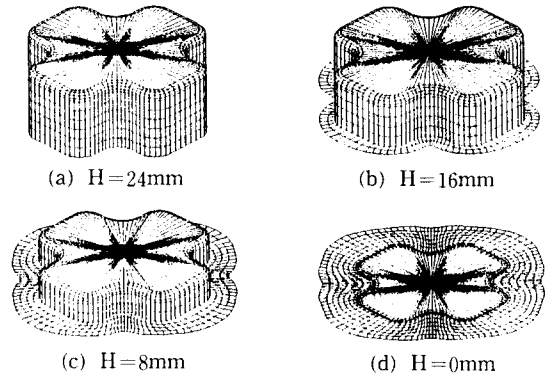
Calculation of blank shape for deep drawing process ($H=24$ mm)
